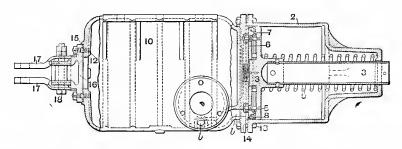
Section Through 12 in. by 8 in. Brake Cylinder and Auxiliary Reservoir Combined.
